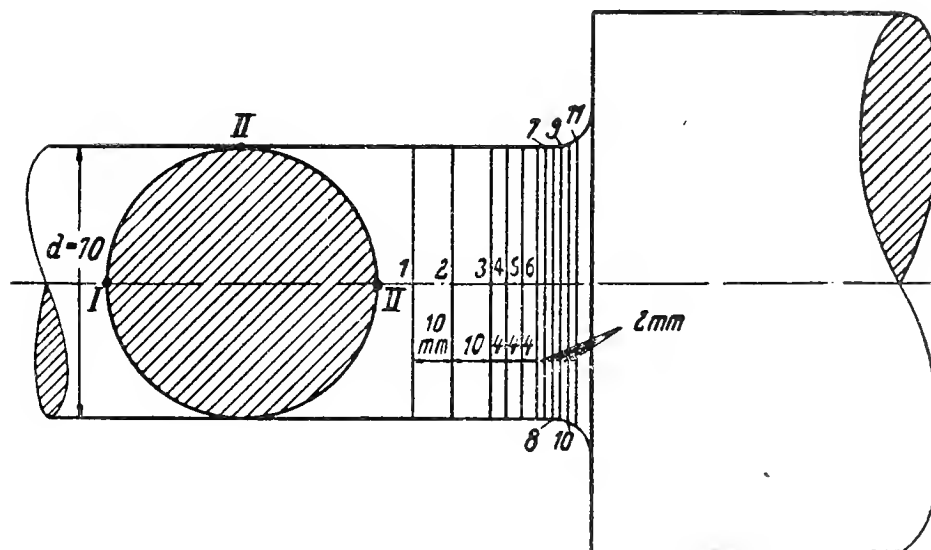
Arrangement of the test points 1 to 11 on the generatrices I to III of the test shaft.
